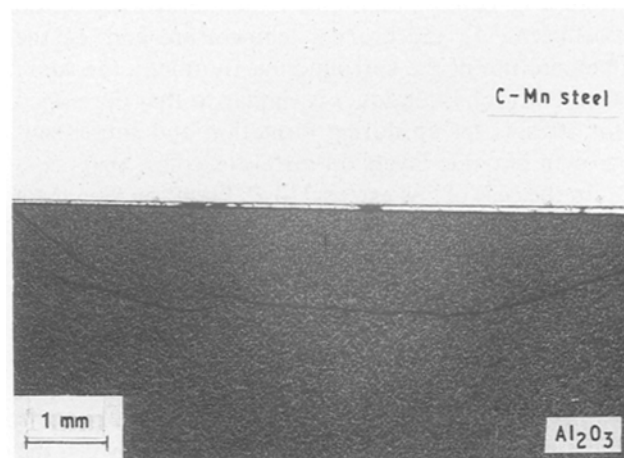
Example of thermally introduced cracks in an alumina-C-Mn steel joint brazed at 890 °C with a 0.1 mm thick Ag-Cu-Ti alloy.
